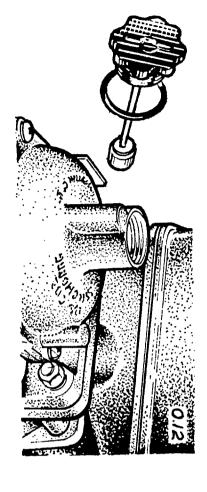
Checking damper oil level in Zenith-Stromberg Carburetter
